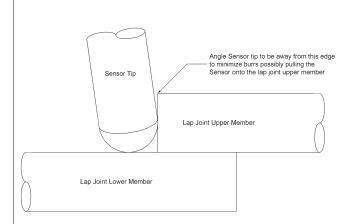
SENSOR ANGLE ON LAP JOINTS
